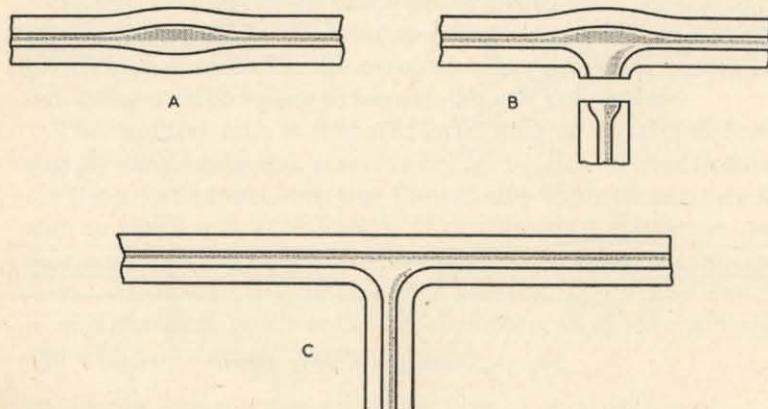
MAKING A T-PIECE IN CAPILLARY TUBING
